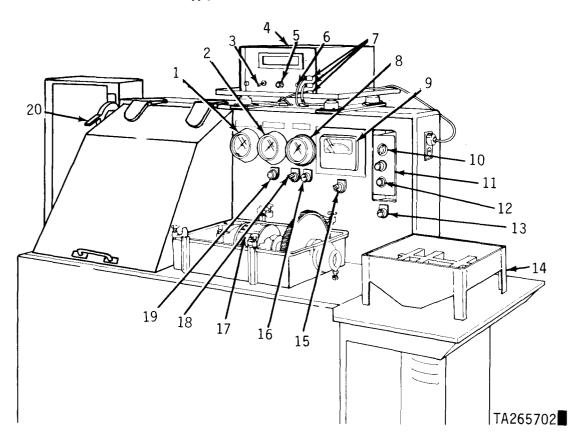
Test stand and advance assembly with coupling guard and housing cover removed.
